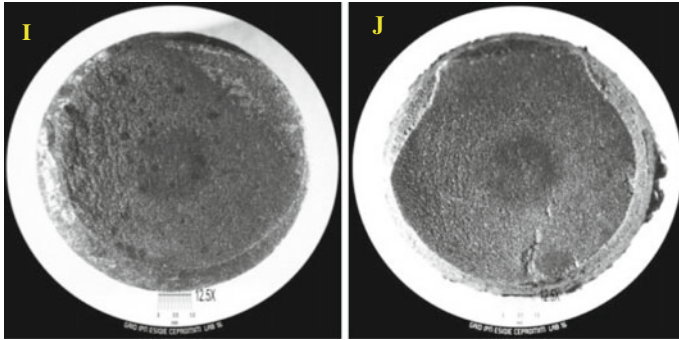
Surface of fracture screws I and J, showing a brittle, flat and smooth fracture
